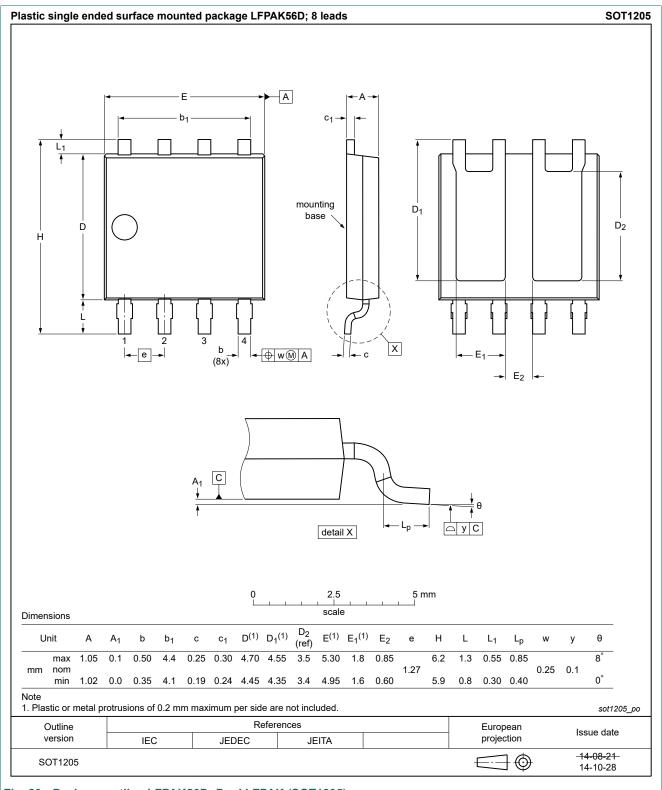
Package outline LFPAK56D; Dual LFPAK (SOT1205)
